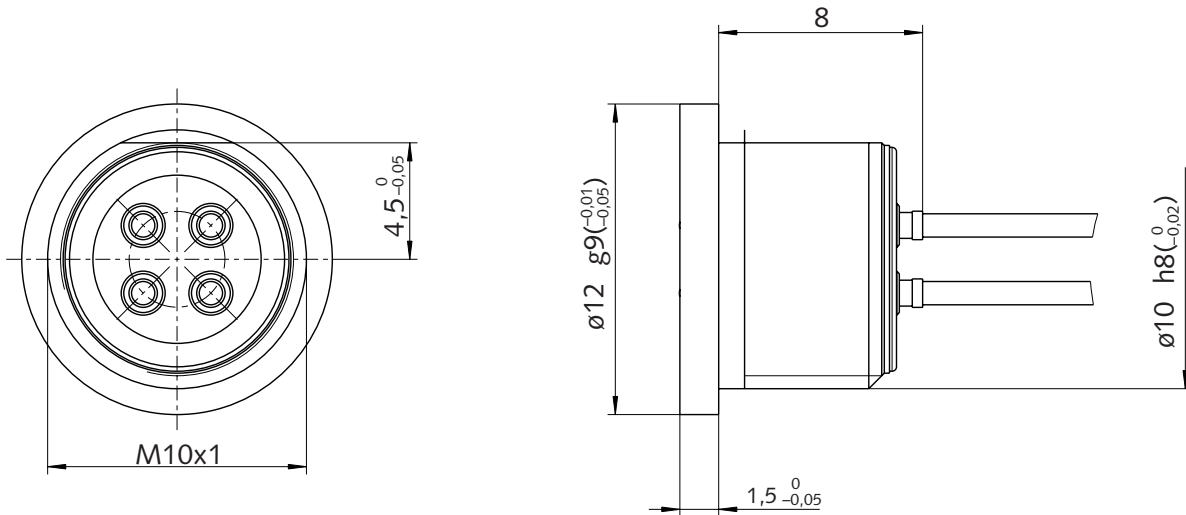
Positive contact element Type 1714B1 of Type 1714B0 for installation in mold insert
